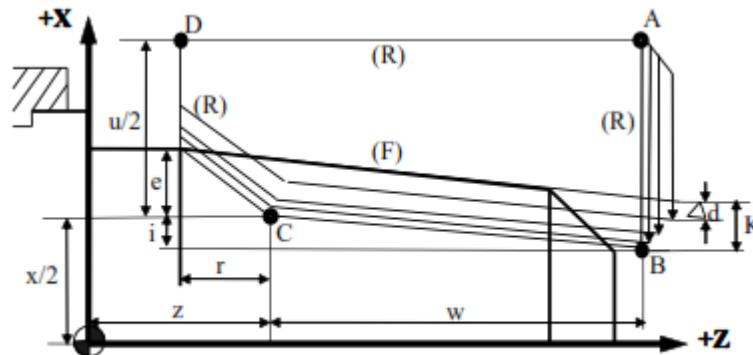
Multiple Thread Cutting Cycle (G76)
